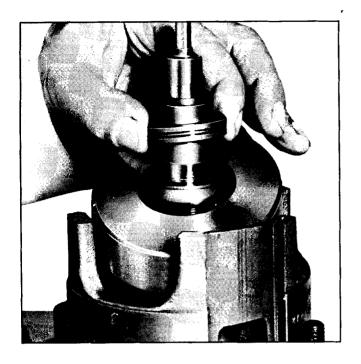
A-83 Removing Rear Thrust Races and Bearing
